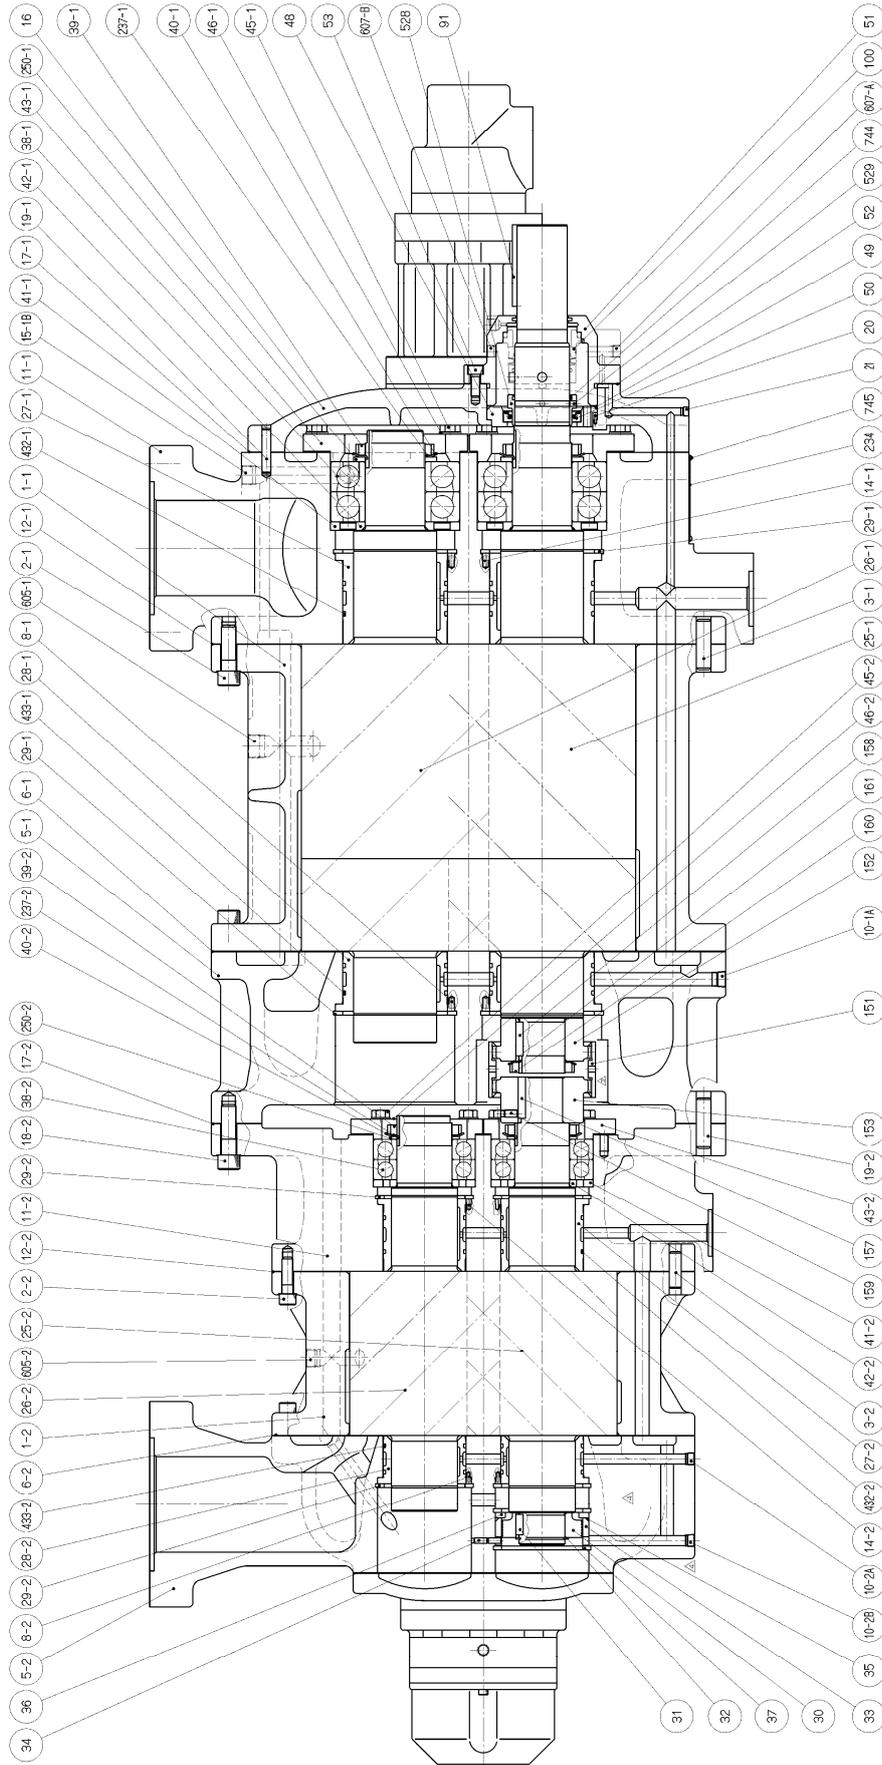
2016LSC Assembly Sectional View (Horizontal)
